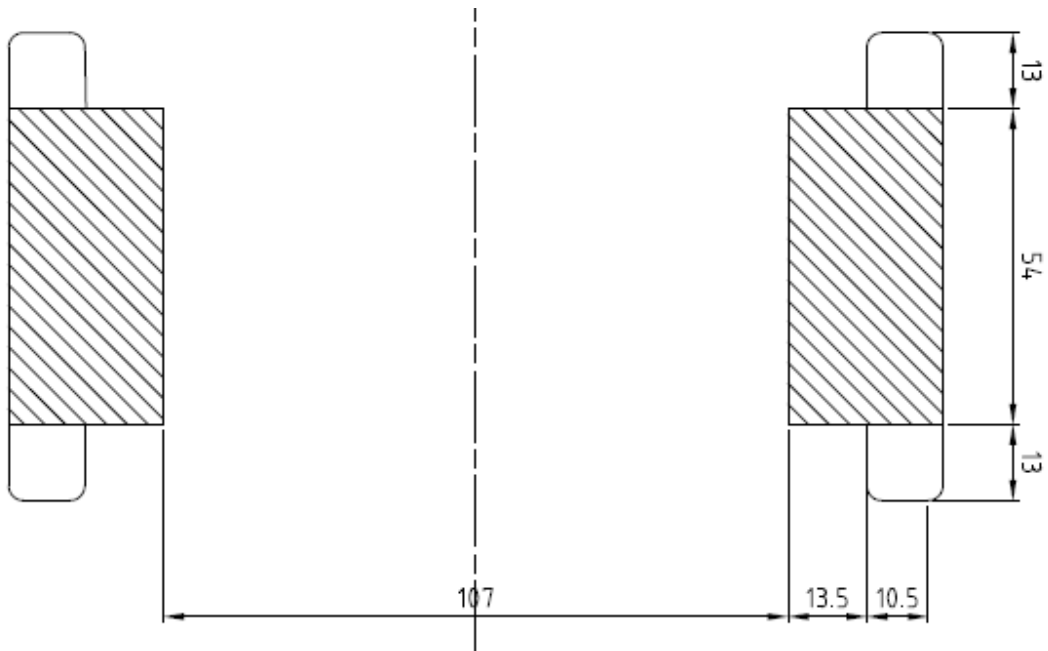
AutoCAD drawing of the outer rotor with end ring
